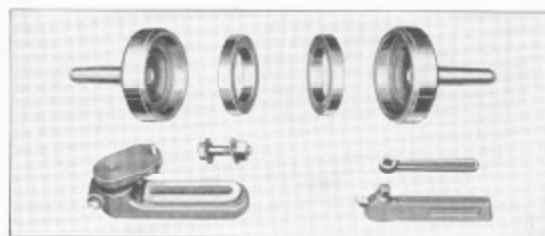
Differential equipment for 13-inch South Bend Lathe.
